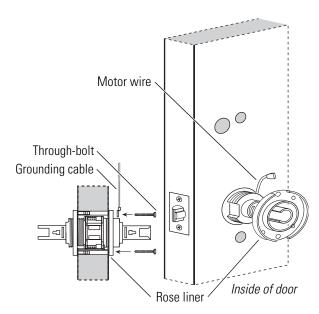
Removing the inside rose liner (Keypad EZ Lock shown)
